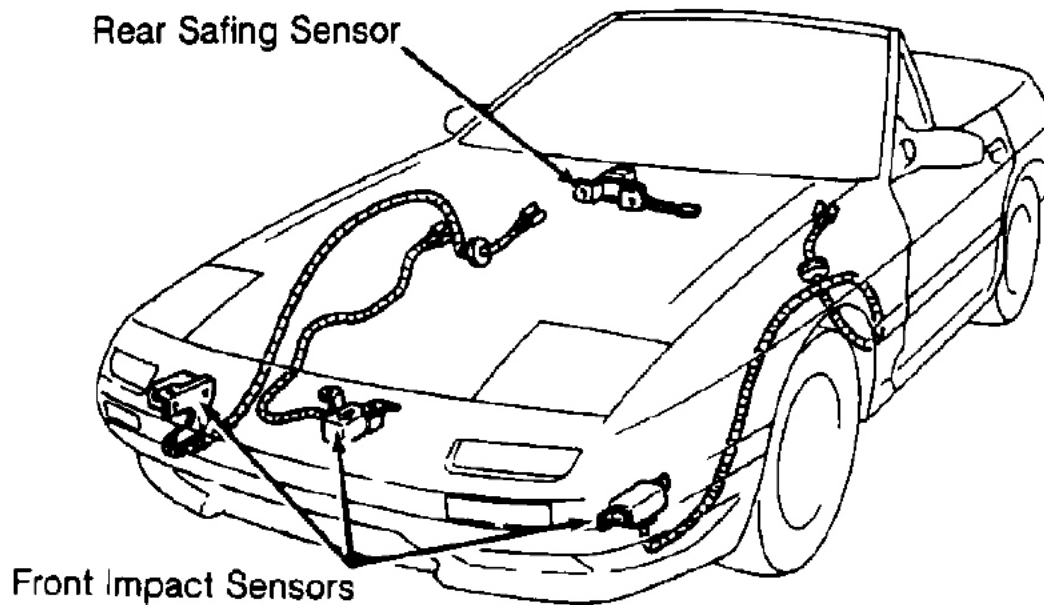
Locating Crash Sensors (RX7 Convertible)
